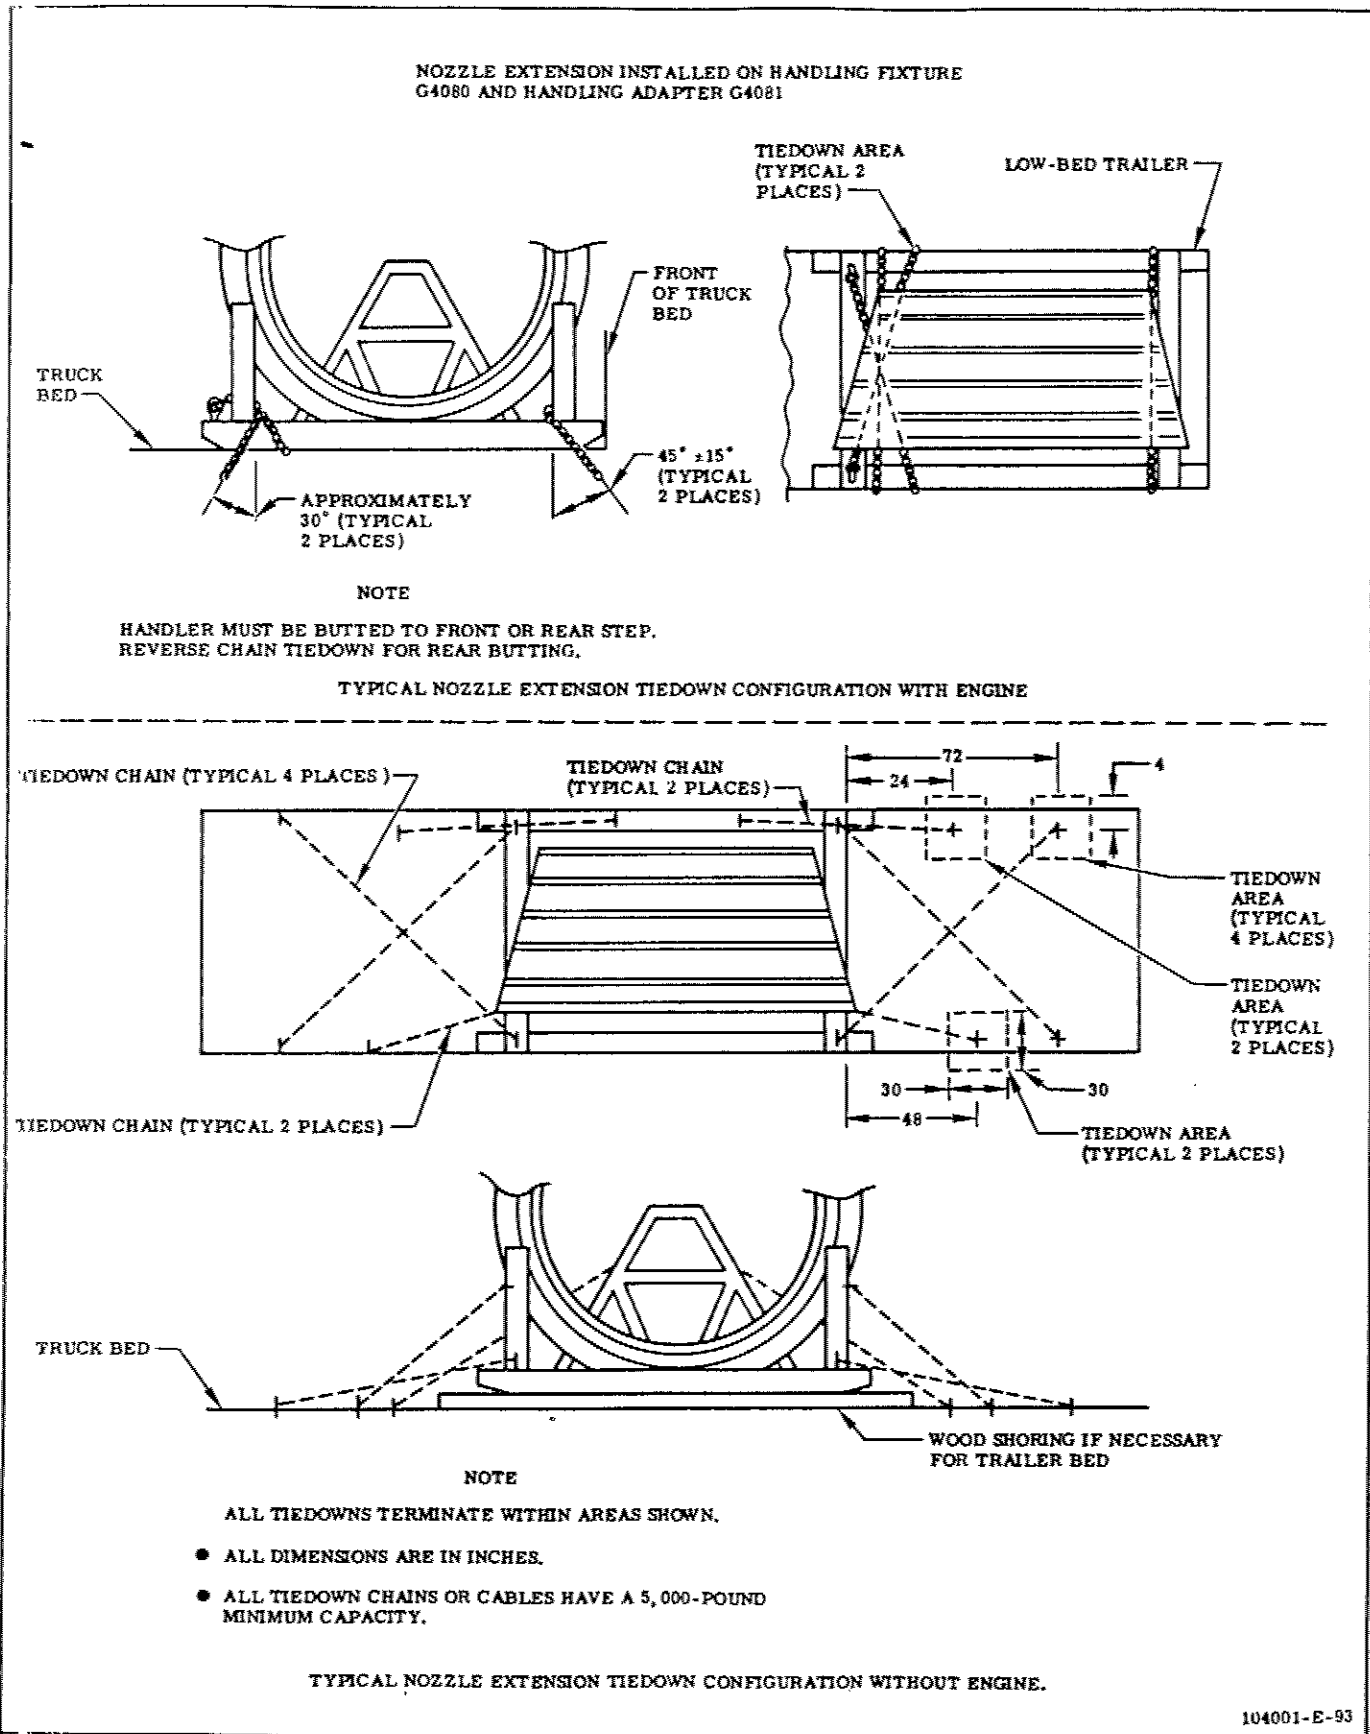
Loading Engine and Nozzle Extension on Low-Bed Trailer (Sheet 3 of 3)
